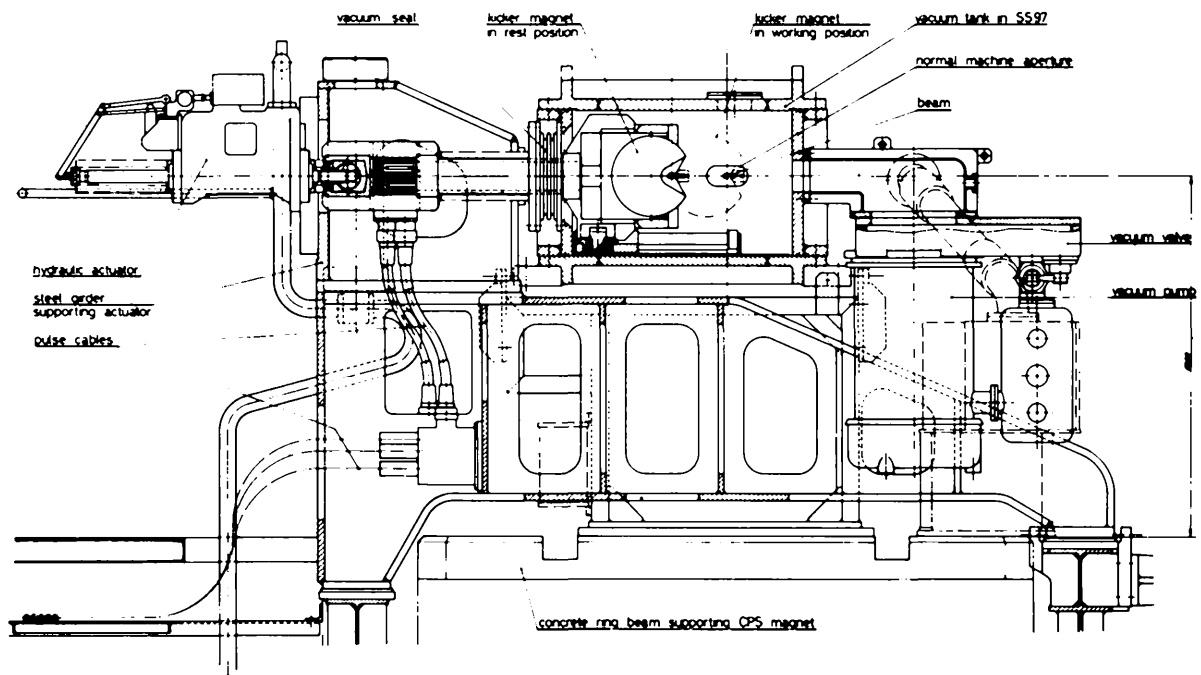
a. Sectional view of the kicker magnet in its vacuum tank.
